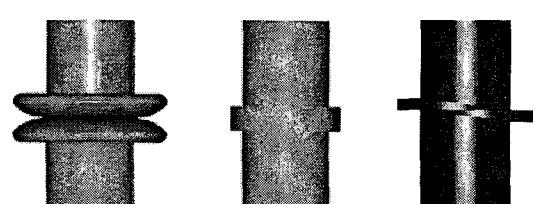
The eccentric-inclined stepped welding dies
